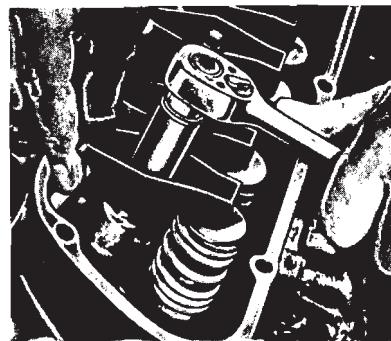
Position of Crankshaft for Setting Valve Clearance
